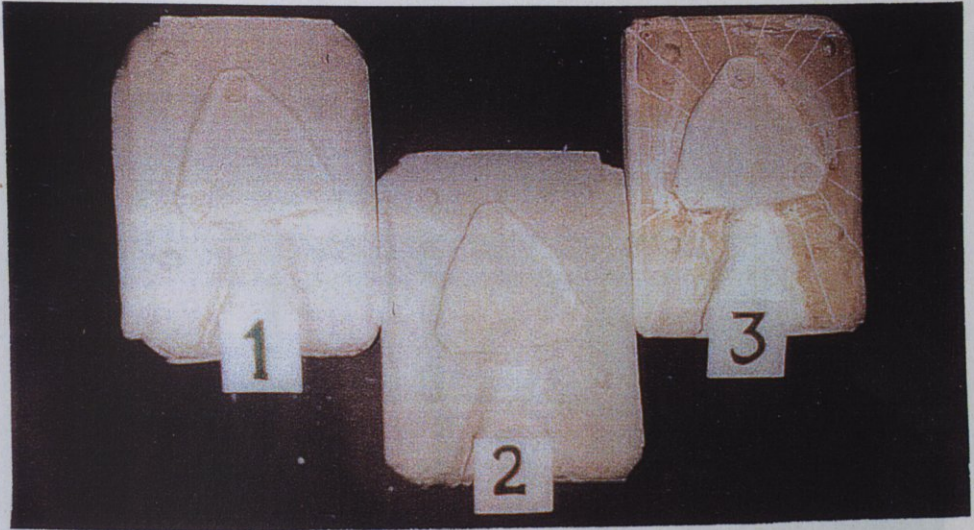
Casting molds No.1-3 prepared for the front engine cover
